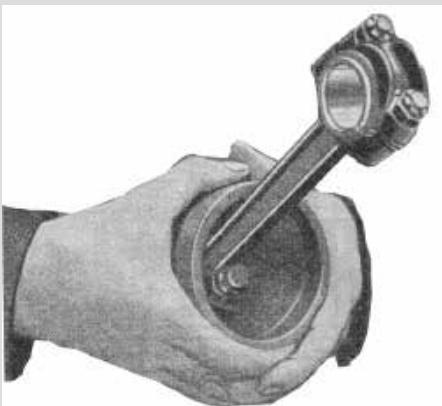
Testing the fit of the small-end bearing. The connecting rod should just drop under its own weight when held as shown.
